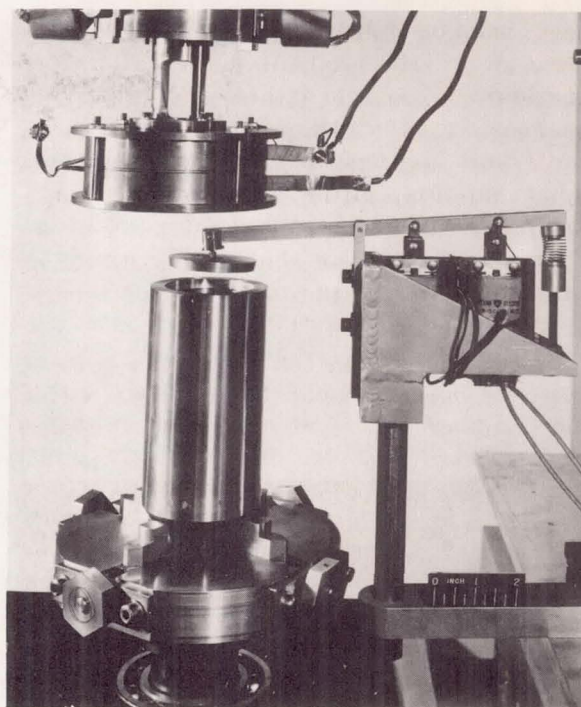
Sealing procedure in vacuum. Electron-beam welding.
